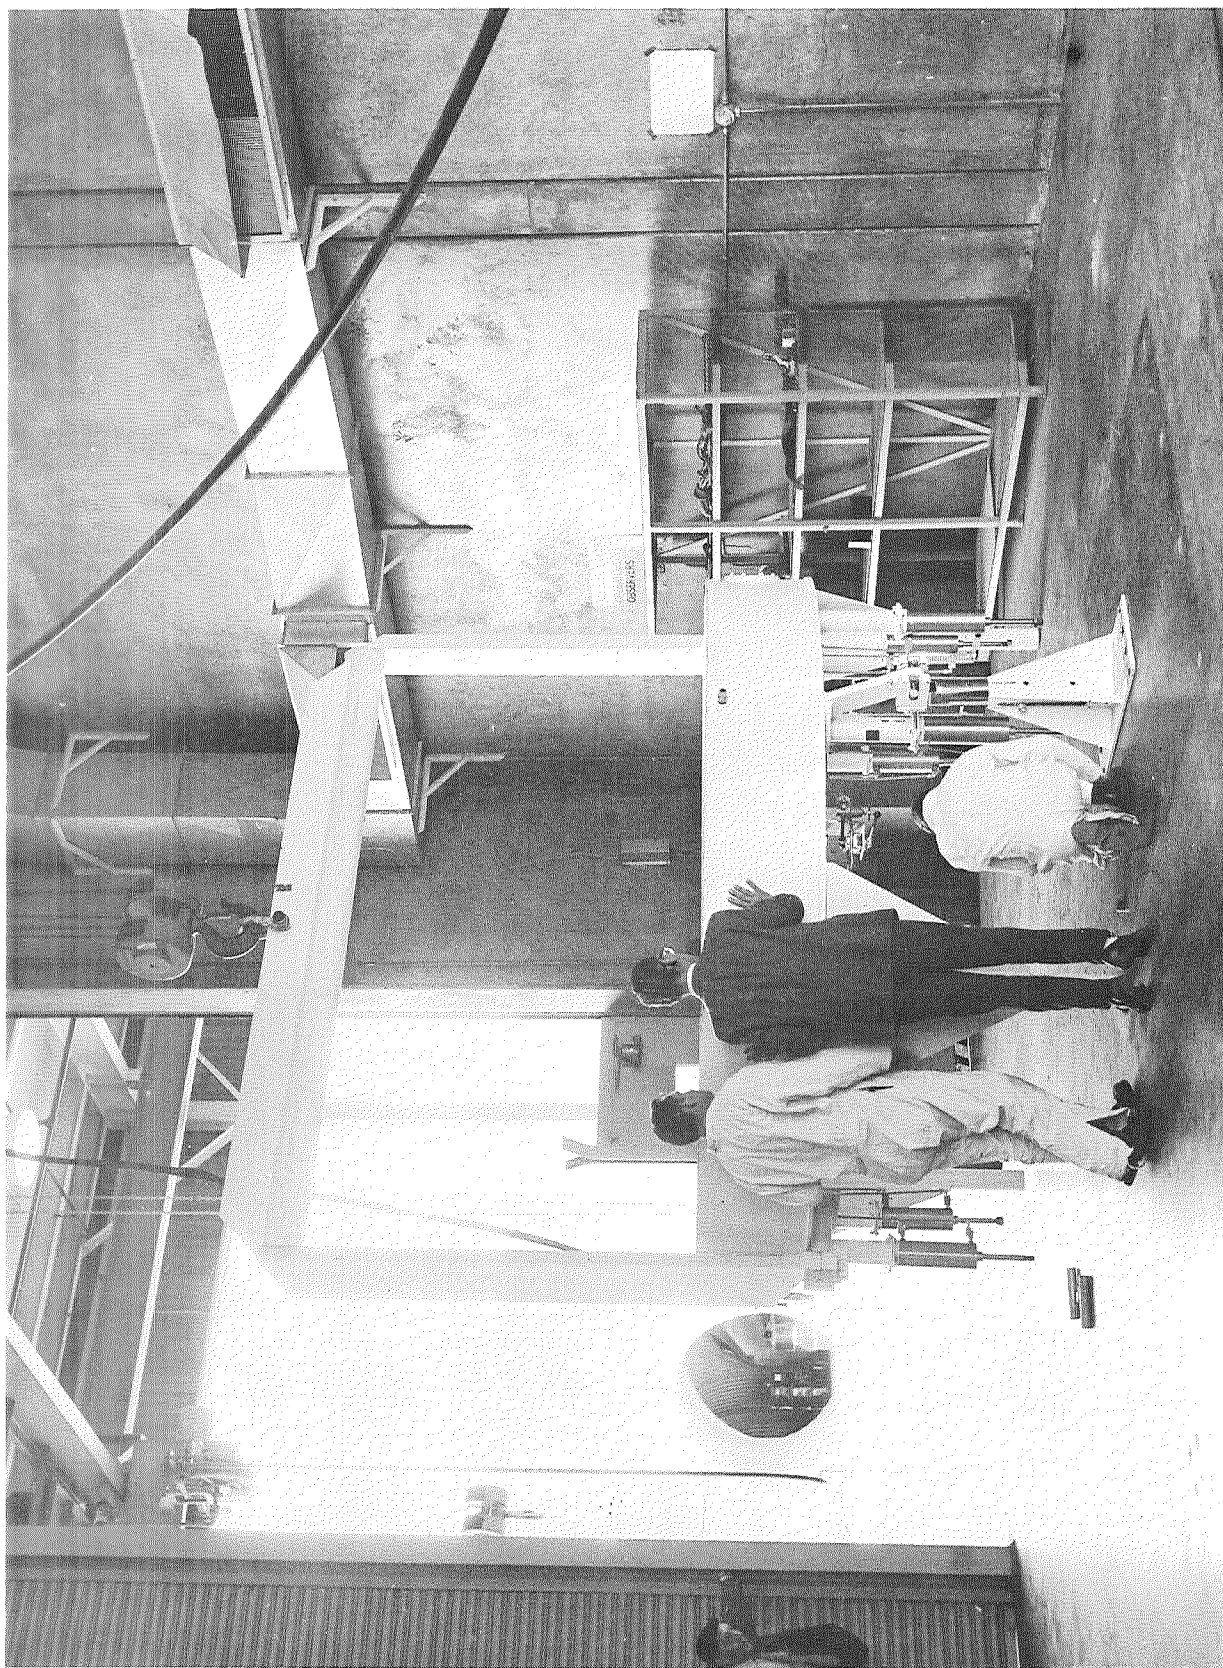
Prepare to Invert the Assembly Bond Fixture
